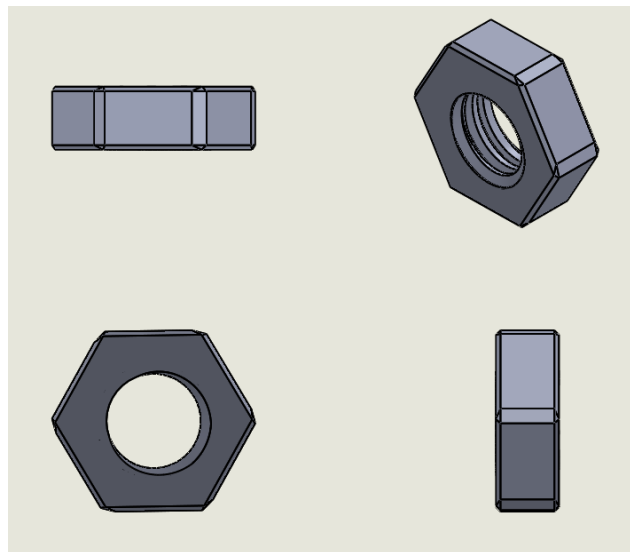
Orthogonal and isometric view of the camera holder joint nut
